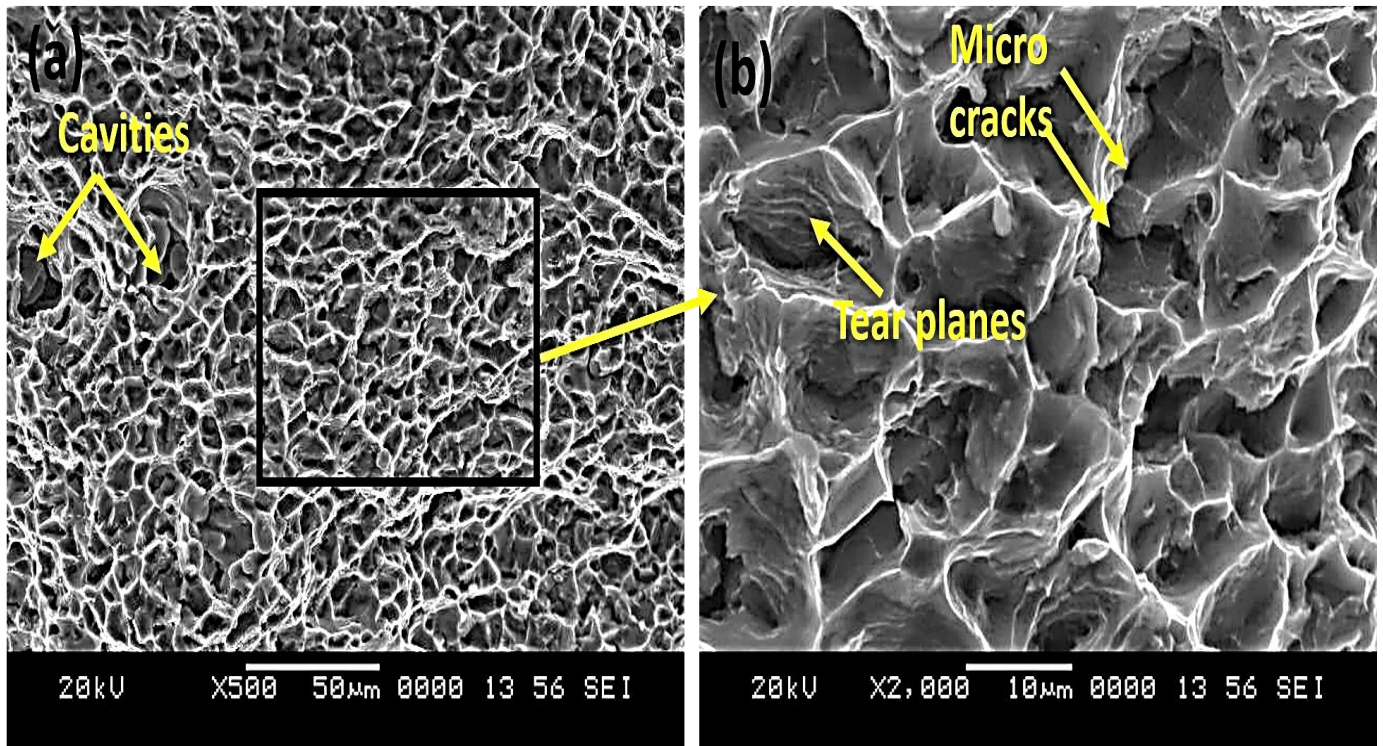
Fractography images of CMT welded A6061-T6 and A6082-T6 joint using ER5356 filler wire: (a) low magnification and (b) high magnification
